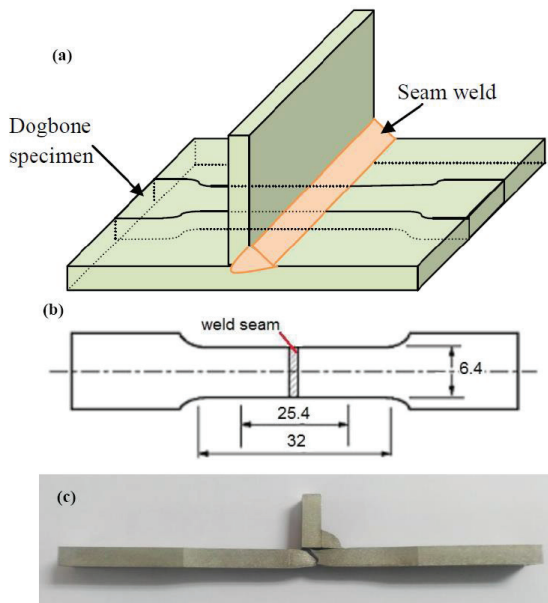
(a) Cross joint of tensile specimens, (b) Basic dimensions of tensile test sub-specimen according to ASTM-E8 and (c) Tensile test specimen of T-joint showing the fractured region
